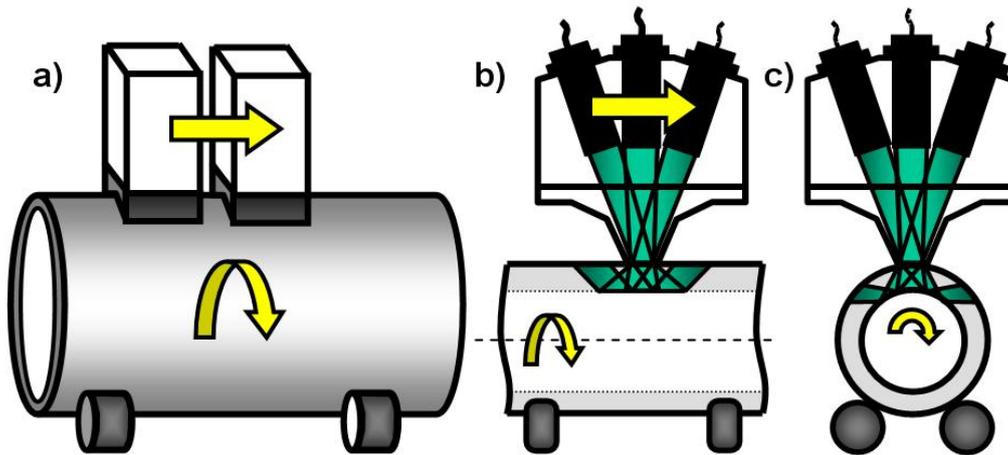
RPT.R-Echograph rotational tube test with multi-probe holders a) rotation of the tube and linear probe holder movement for helical test traces, b) multi-probe holder in cross sectional view showing transverse defect detection and wall thickness measurement, and c) multi-probe holder showing longitudinal defect detection and wall thickness measurement.
